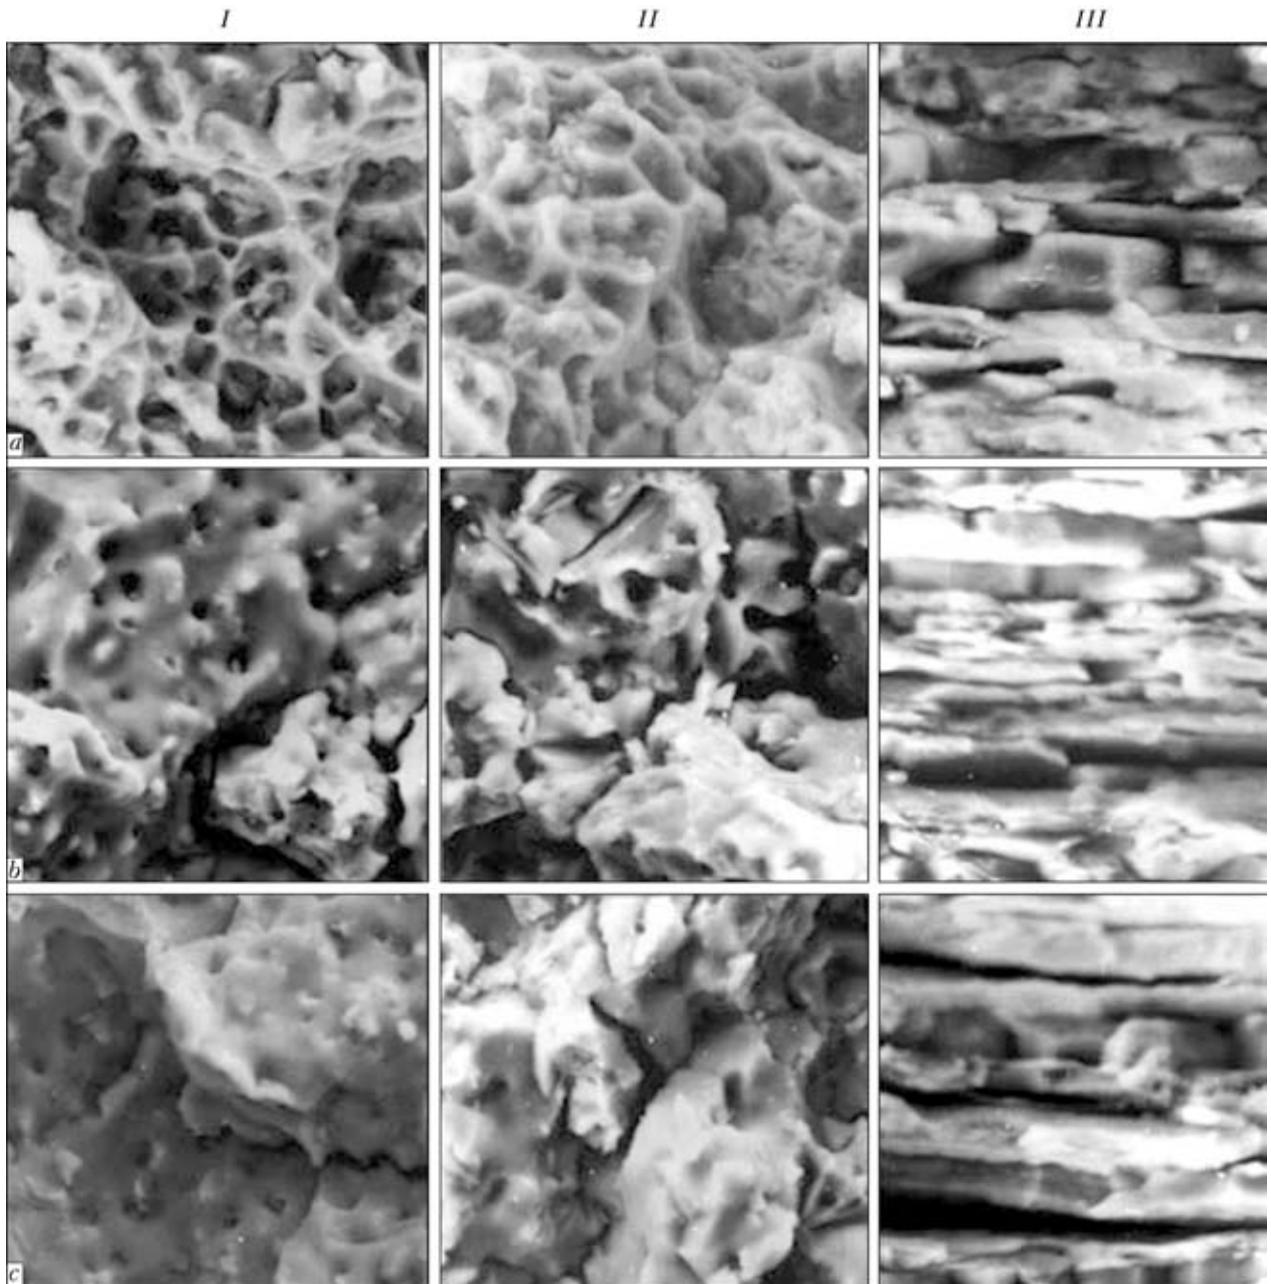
Fractograms of fracture surface of individual zones of 1201 alloy welded joint at low testing temperature (*a-c* and *I-III* – see Figure 3)
